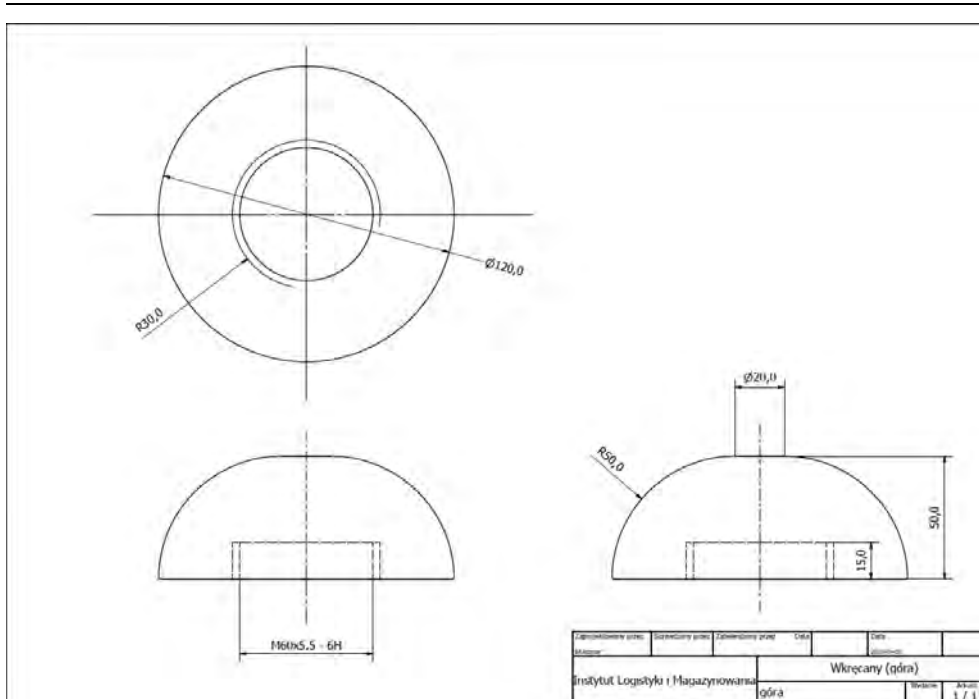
Float 2 "screwed"-upper part - the technical drawing
